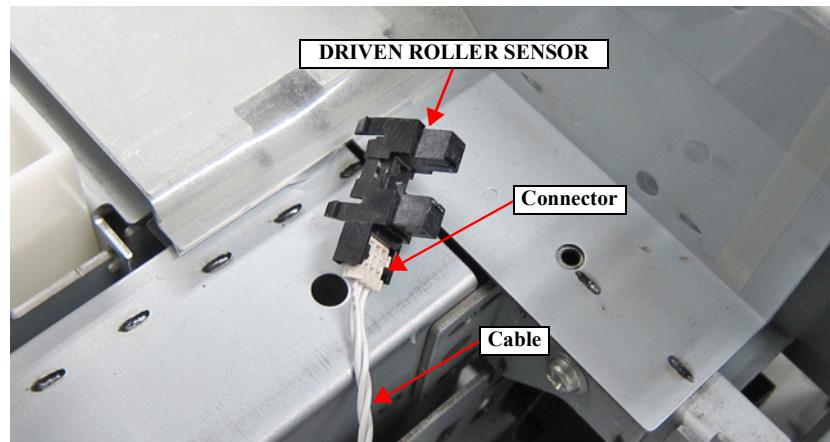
Removing the DRIVEN ROLLER SENSOR (3)
